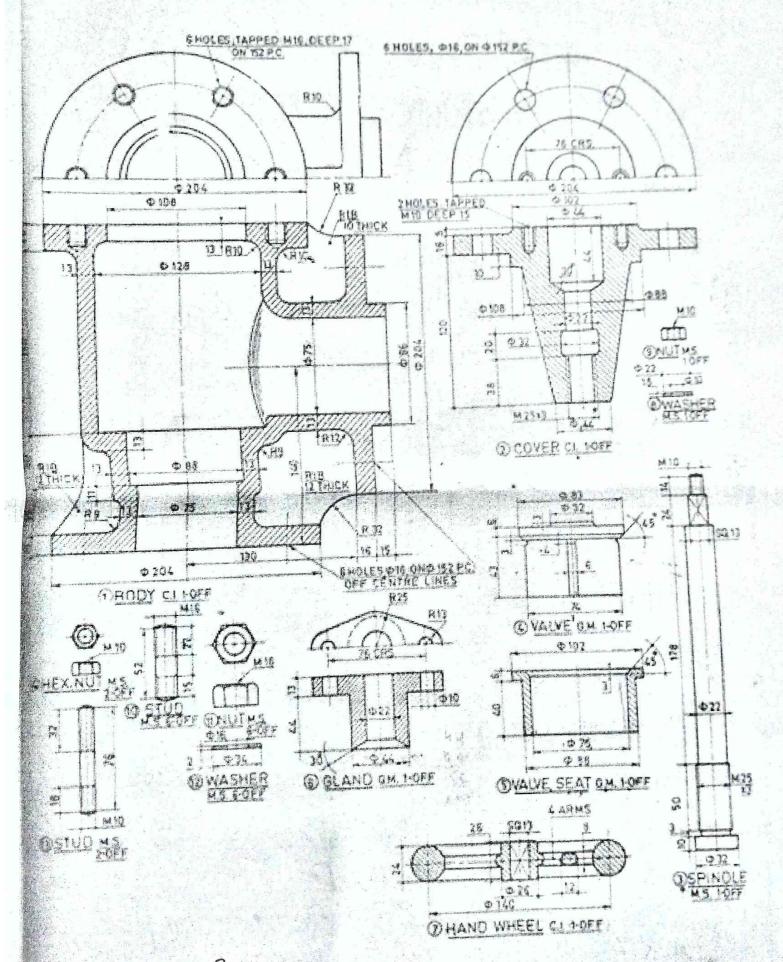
Details of a 76 mm Freed-check Valve (Third Angle Projection)
